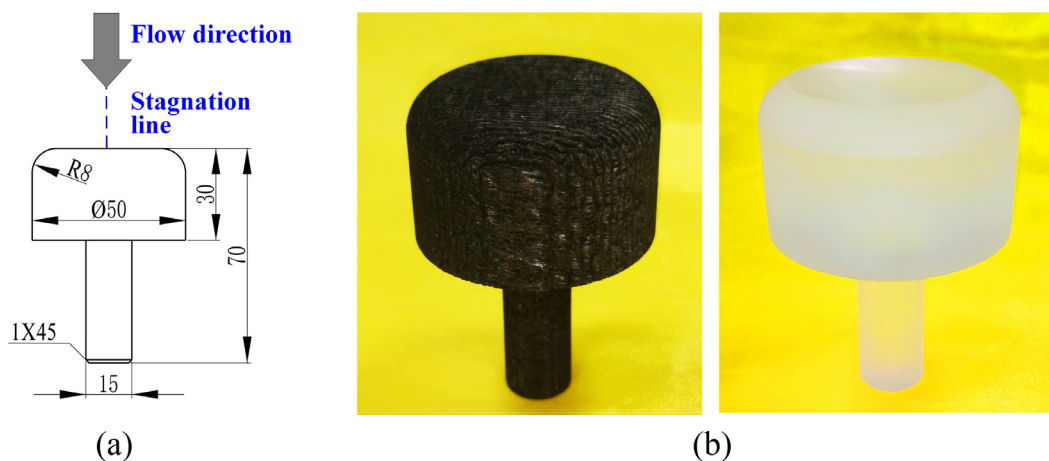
Shape of the samples: (a) Design graphics and (b) photos of the C/C composite (left) and quartz (right).
